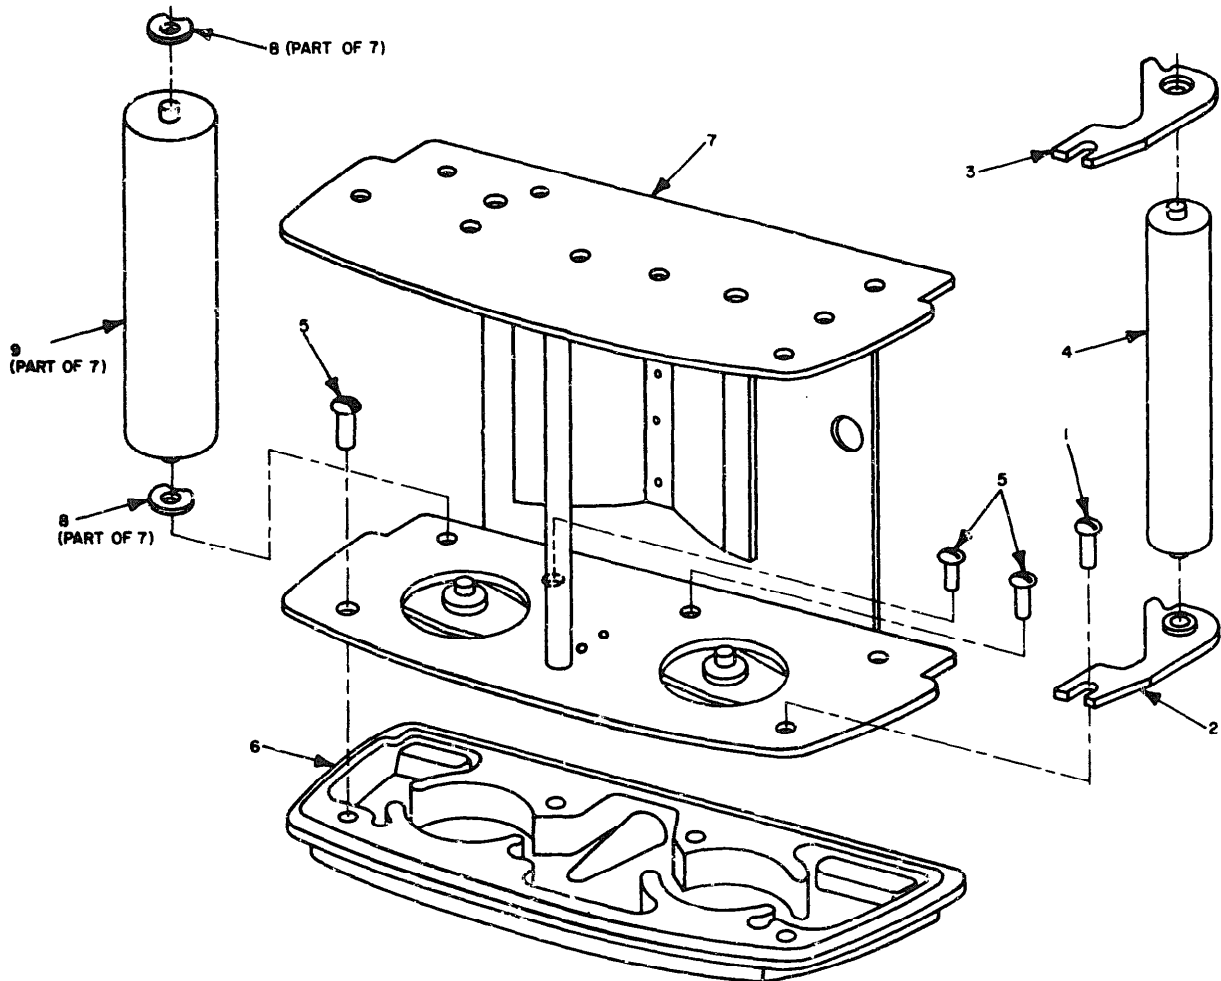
RH/20 Carriage complete disassembly (stage 2) exploded view.
